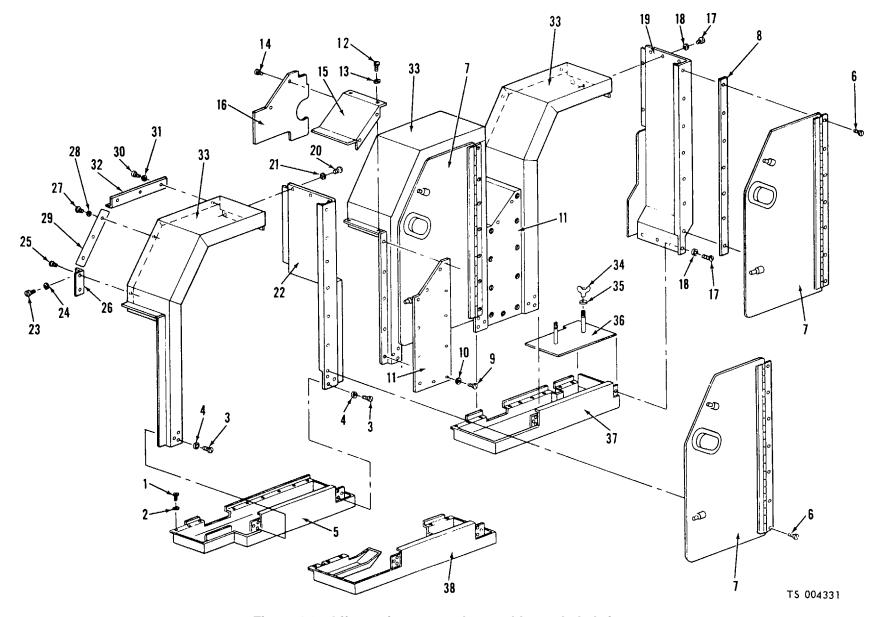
Offset unit rear guard assembly, exploded view. 4-12
